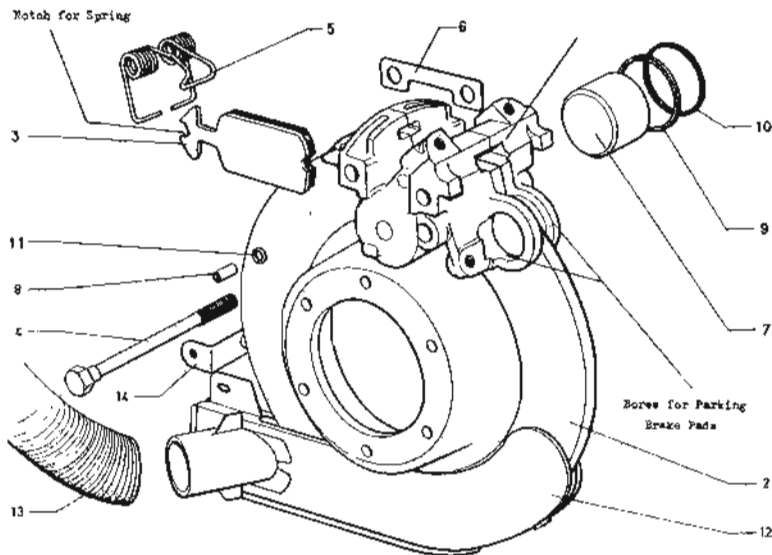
FRONT DISC BRAKE ASSEMBLY.
